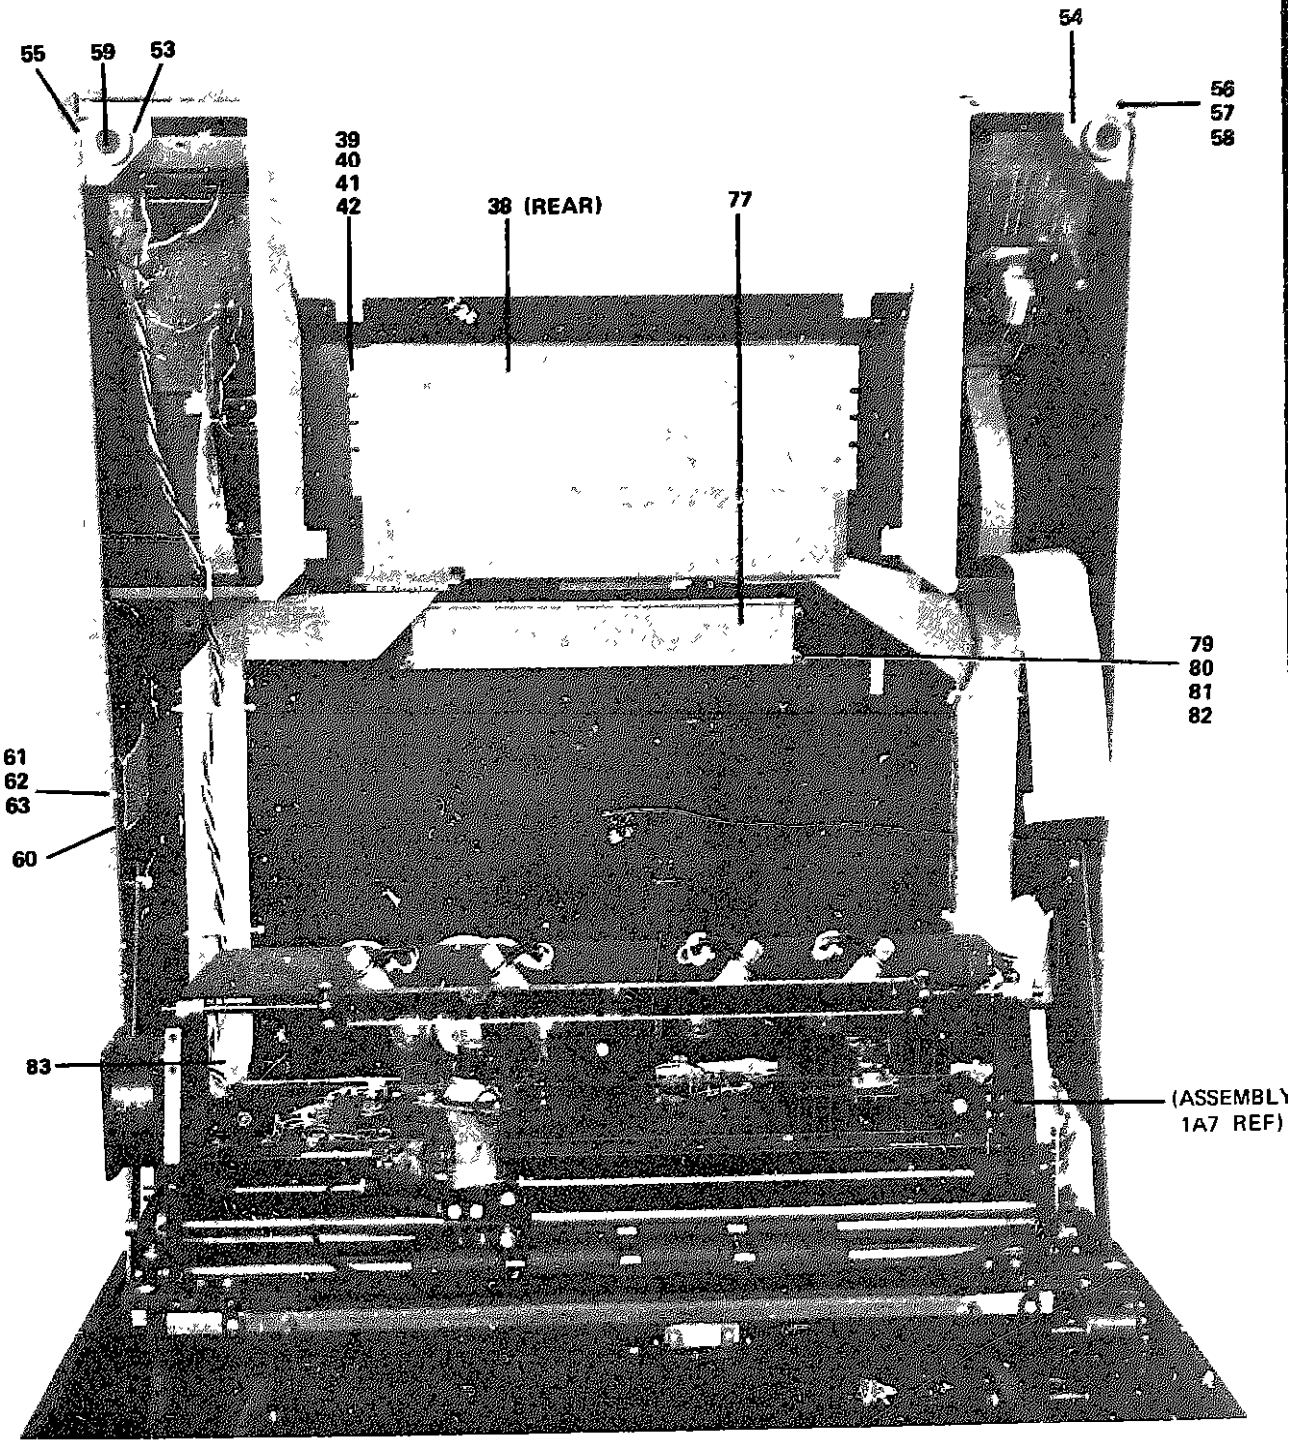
CONTROL CONSOLE ASSEMBLY BOTTOM 1A6 (SHEET 6 OF 6)
